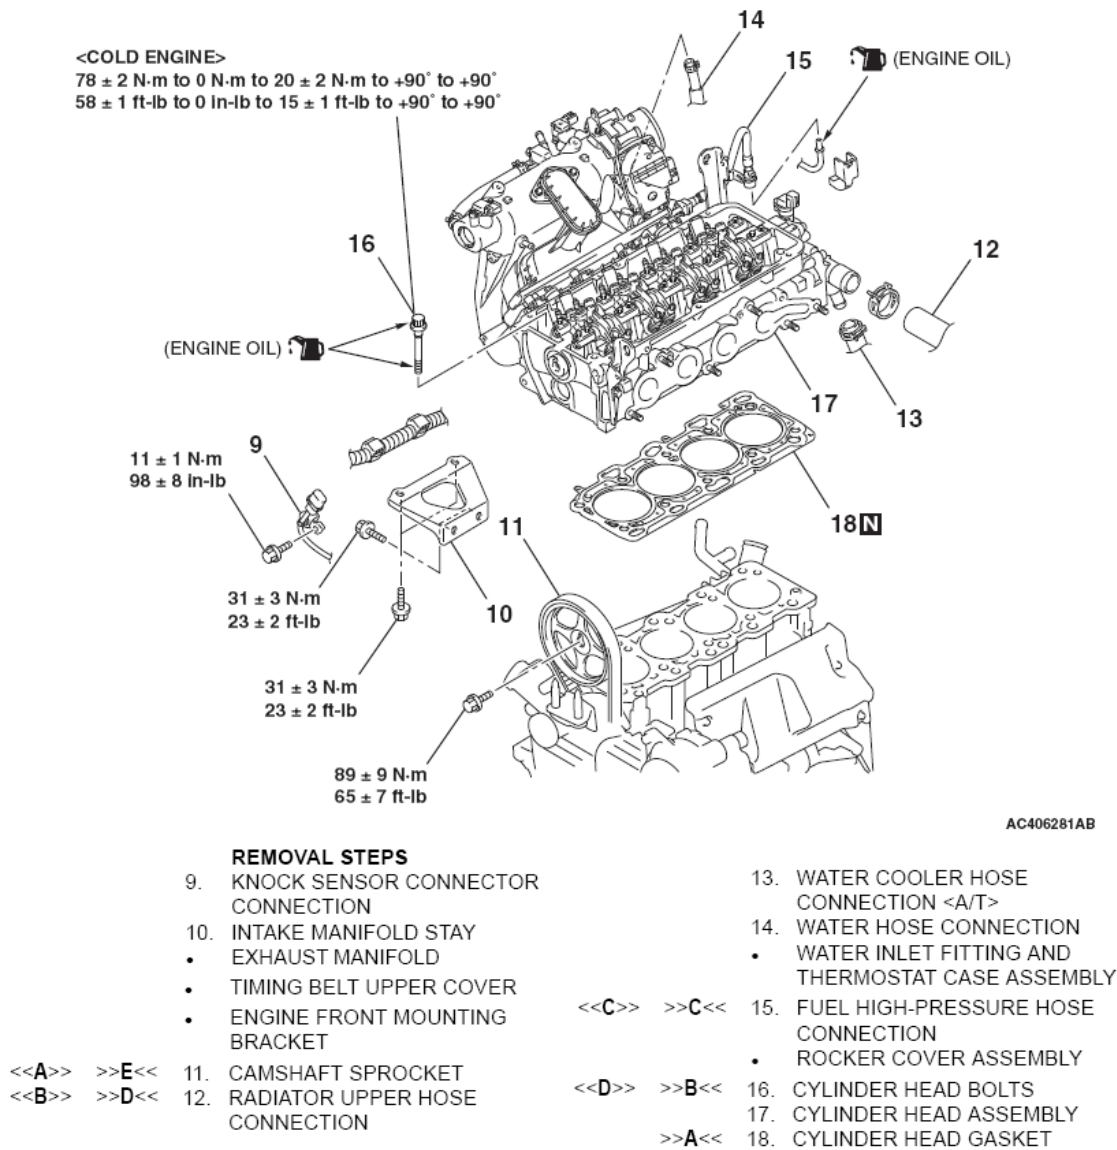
Removal/Installation Of Cylinder Head Gasket Components With Torque Specifications (2 Of 2)
